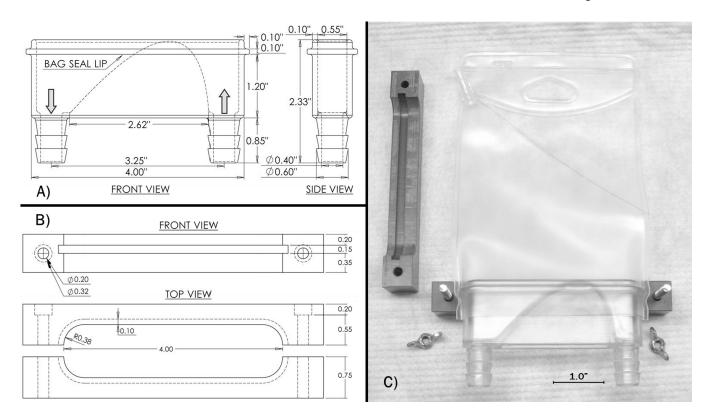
Schematic of the reusable ½"-port A) printed base, B) machined clamp set, and C) the manufactured reservoir components with the modified blood bag before assembly.
